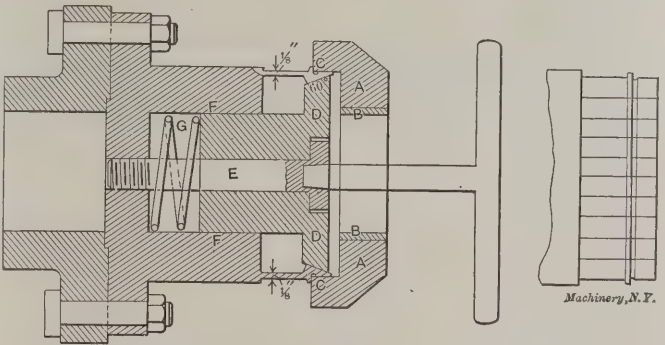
Spring Collet for Holding Rings, Etc., by the Inside.
